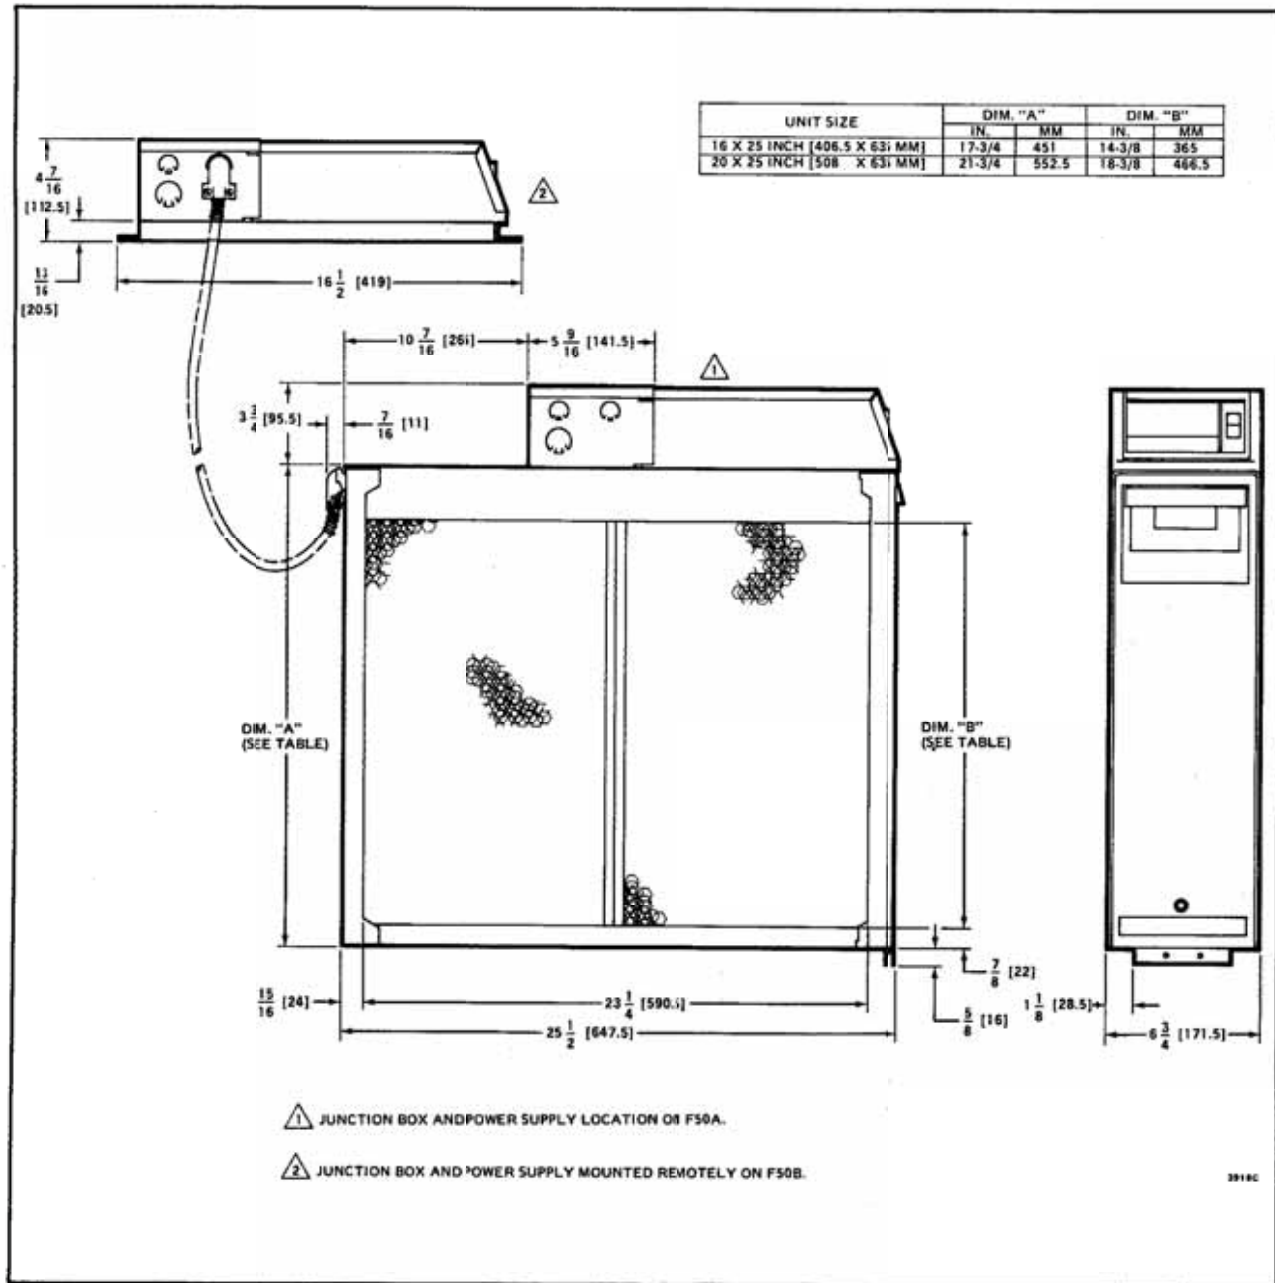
INSTALLATION DIMENSIONS, IN INCHES [MILLIMETERS SHOWN IN BRACKETS], OF THE F50 ELECTRONIC AIR CLEANER.
